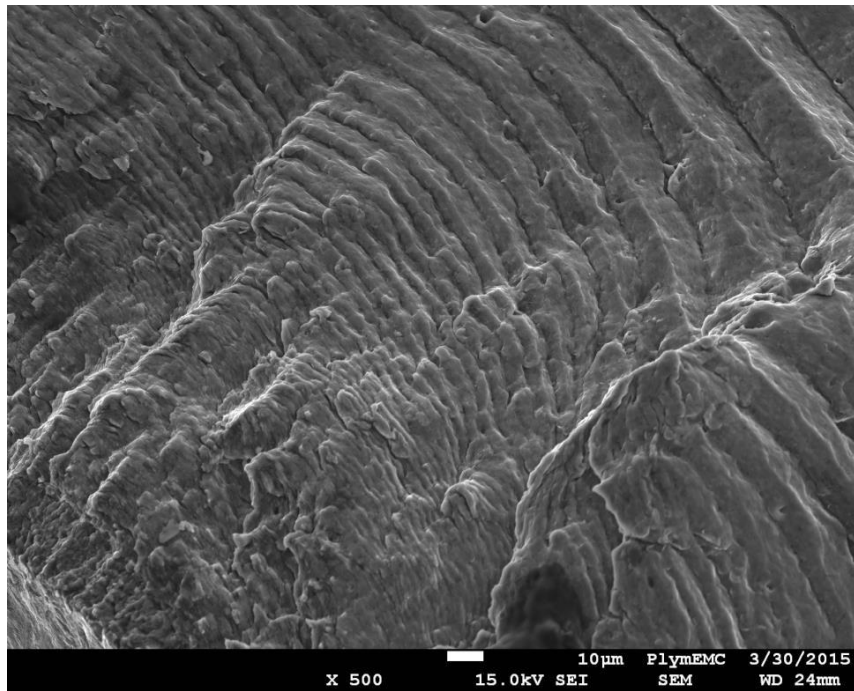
A smaller secondary site of fatigue crack initiation is present at the inner edge of tube specimen IPh2 in the lower left corner of this image.
